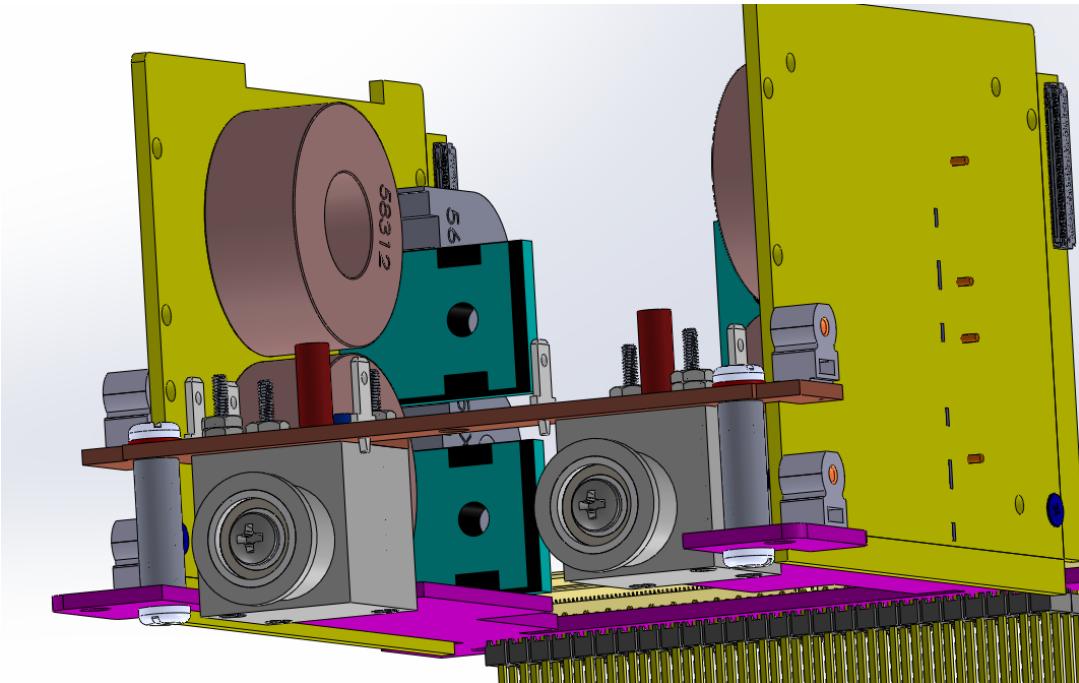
When connected, the Spacers, Belleville Spring Lock Washers, and M3 (FH) Spacer Screws should look like this.
